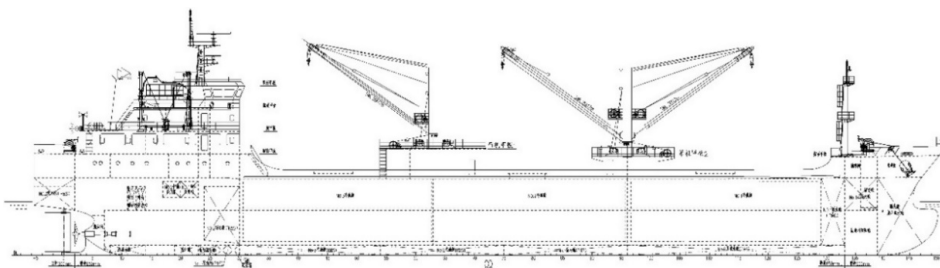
OU YA LENG 6 General Arrangement Drawing.¹
